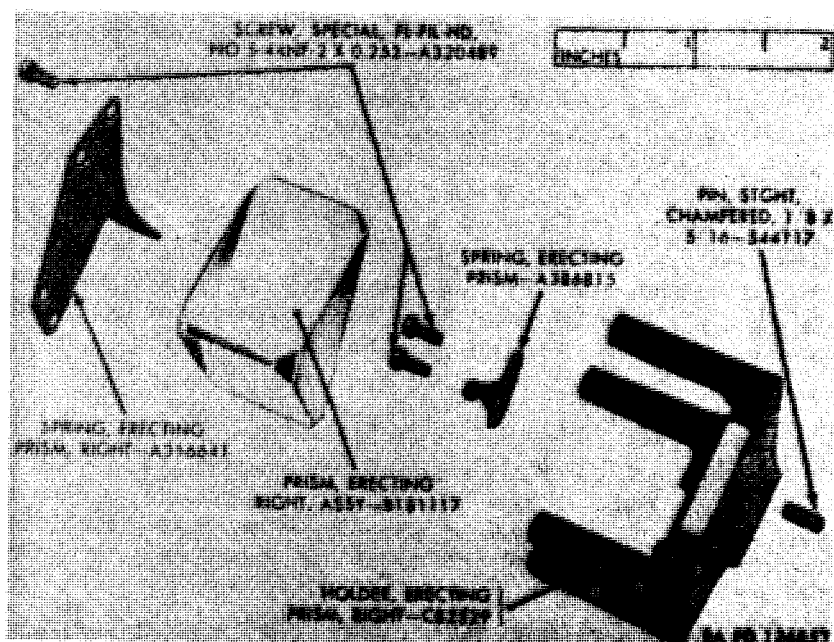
Right erecting prism holder assembly C82528 - exploded view.
